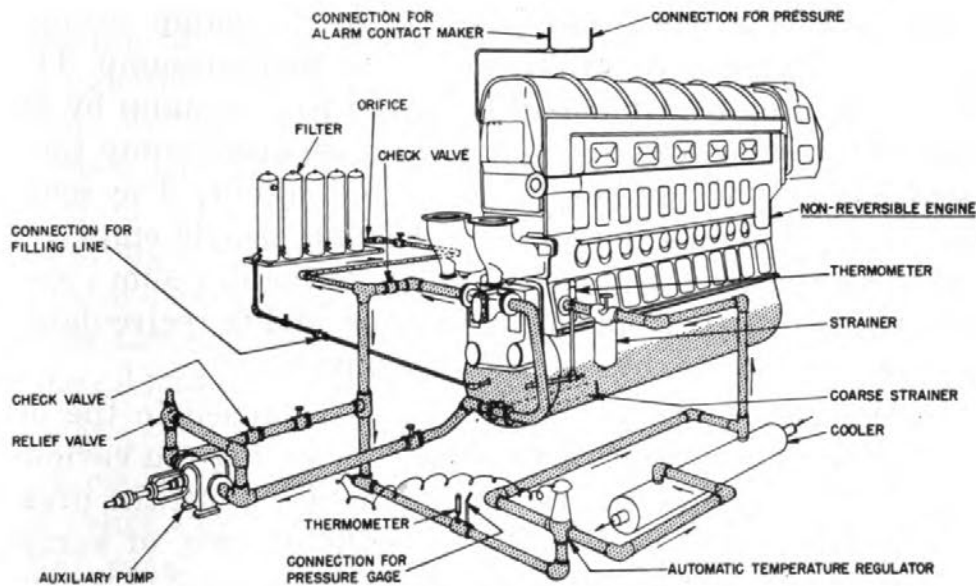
Bypass-type lubricating oil filter system (FM 38D8 1/8).
